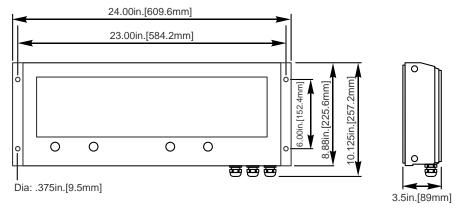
XR 4500 Outline dimensions and hole pattern
